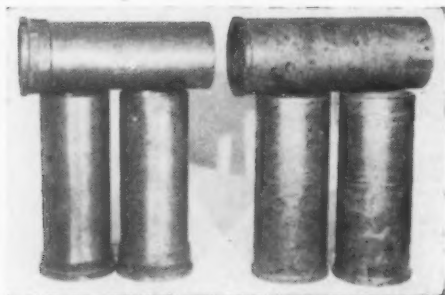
CENTRIFUGAL CAST IRON AUTOMOTIVE CYLINDER LINERS BEFORE AND AFTER MACHINING. MADE BY I.P.T. FOUNDRY.
